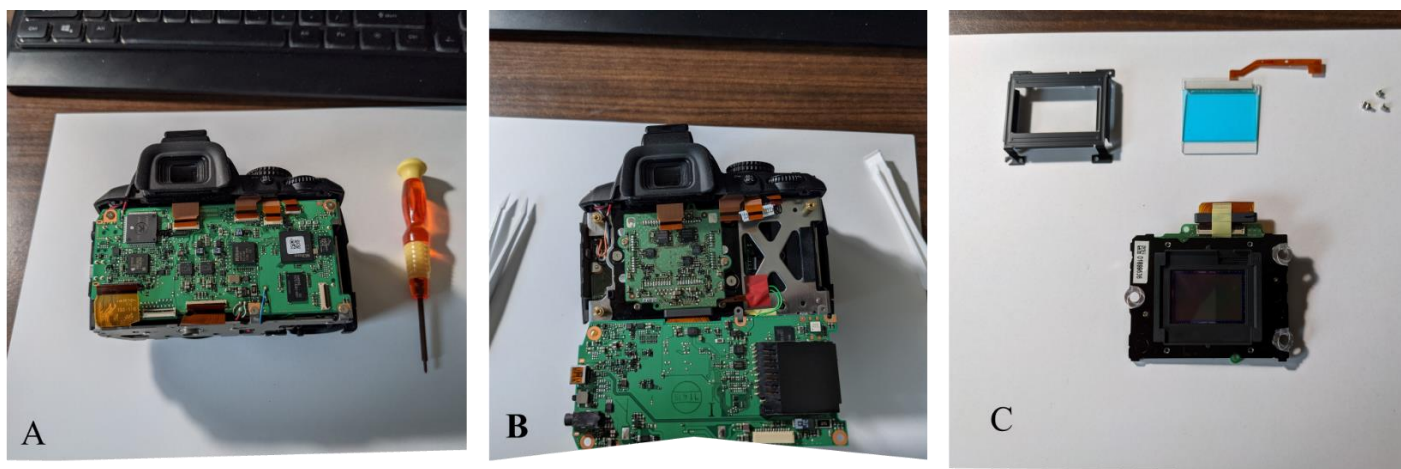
Removal of the NIR filter. A. Removal of the camera's rear panel; B. Camera circuit board removal; C. Camera sensor assembly after NIR filter (blue square) removal.
